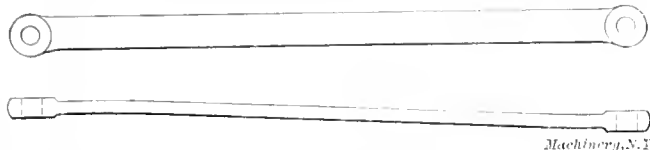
Offset Connecting-rod which is milled and drilled in the Fixtures.
